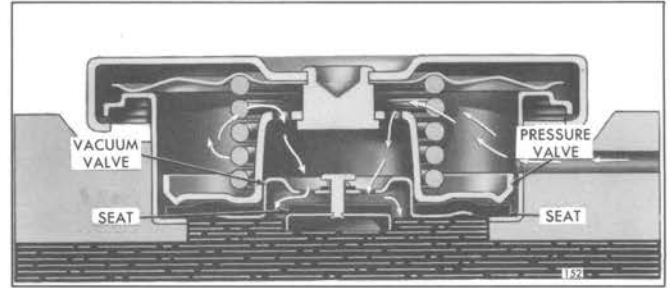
Pressure Control Cap (Vacuum Valve Open)
